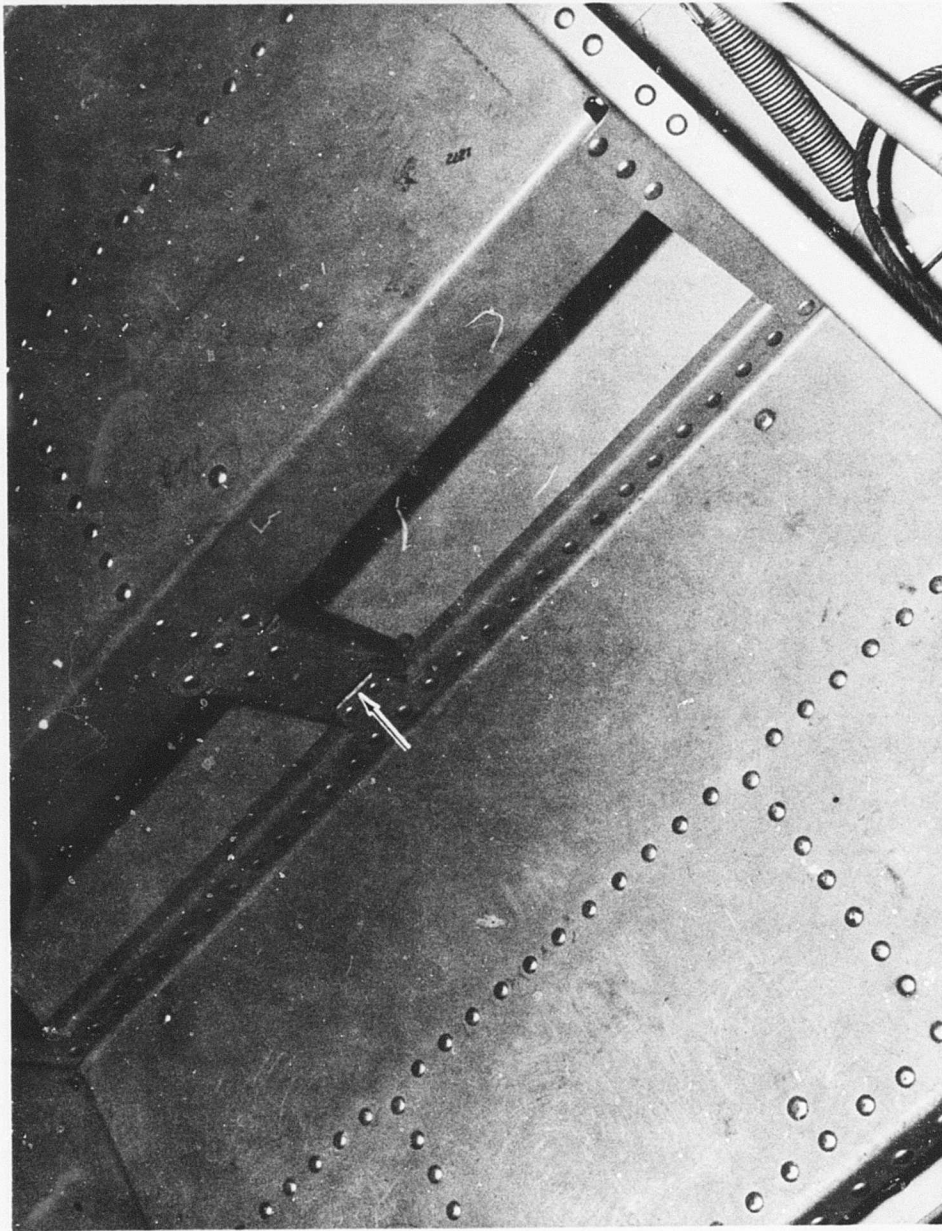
Lower Personnel Door, Redesign, Riser Fracture.
